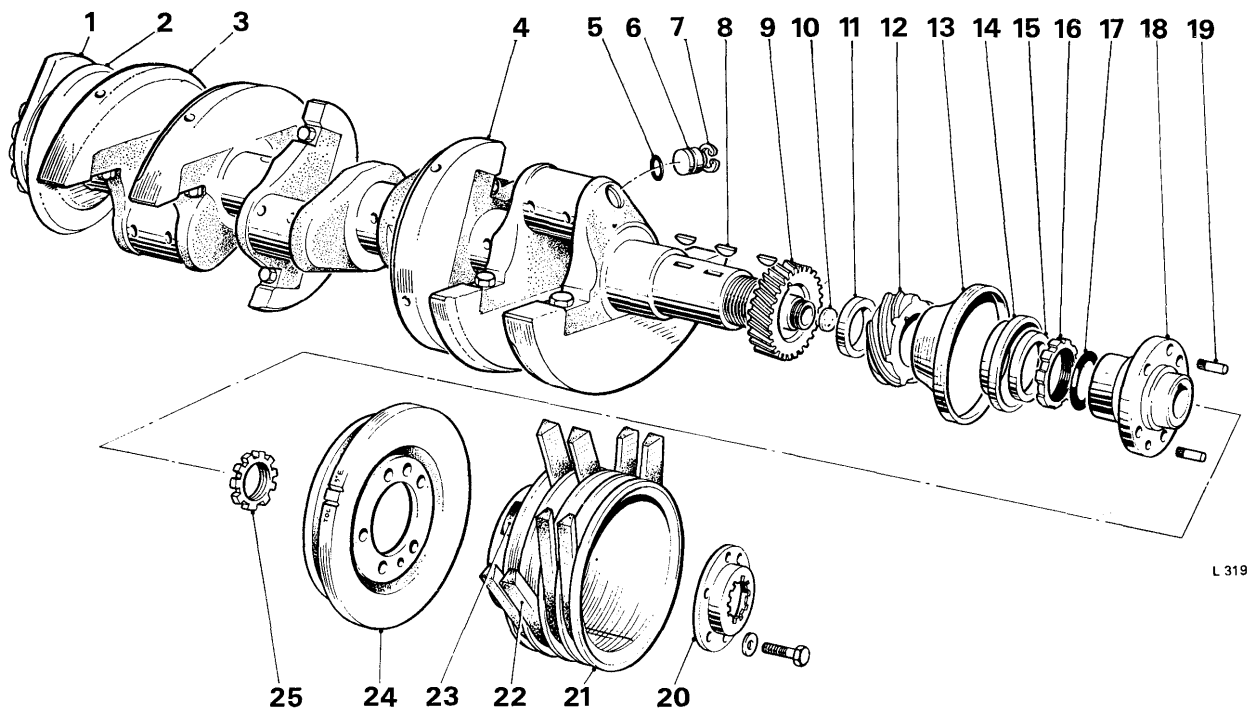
EXPLODED VIEW OF CRANKSHAFT 9,90 cm. (3.900 ins.) STROKE ENGINE
